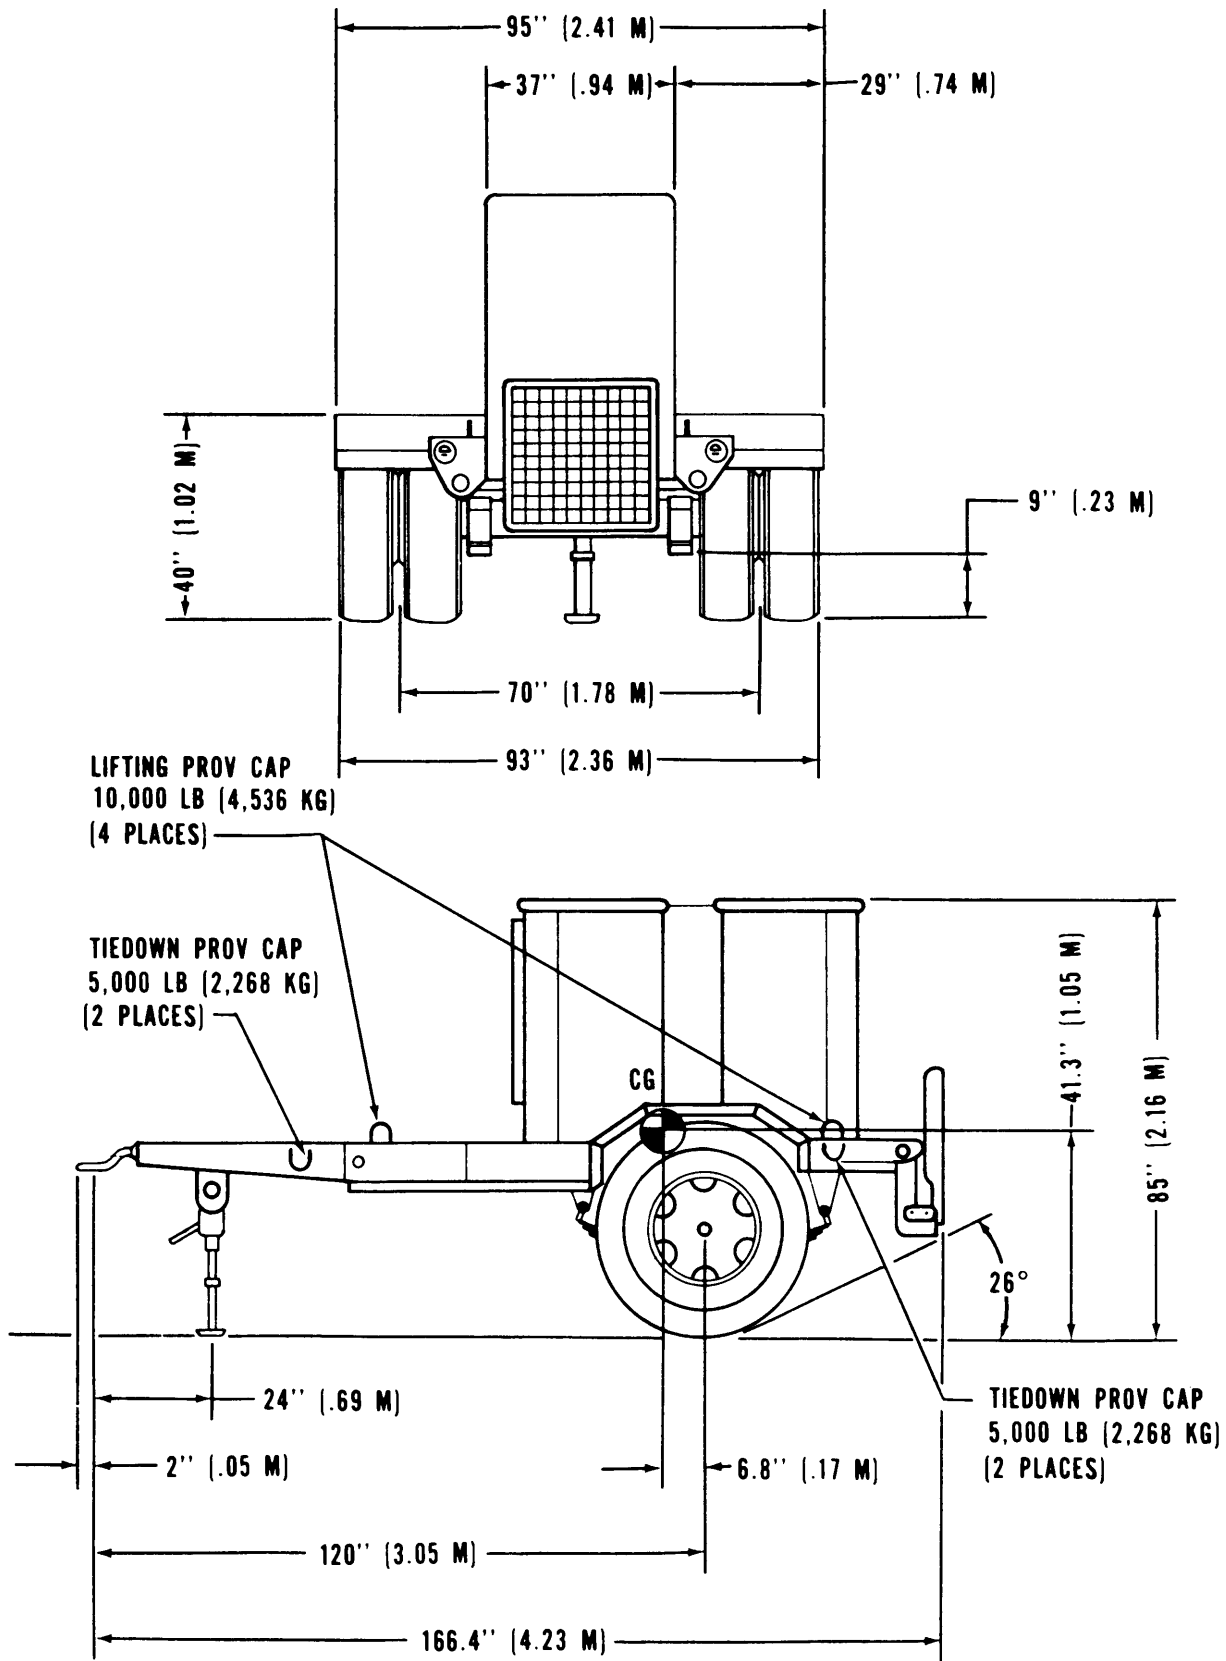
Side and rear elevation, power unit, PU-7821M.
